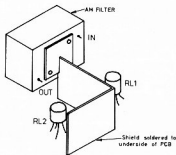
[a] FILTER MOUNTING & SHIELD LAYOUT
